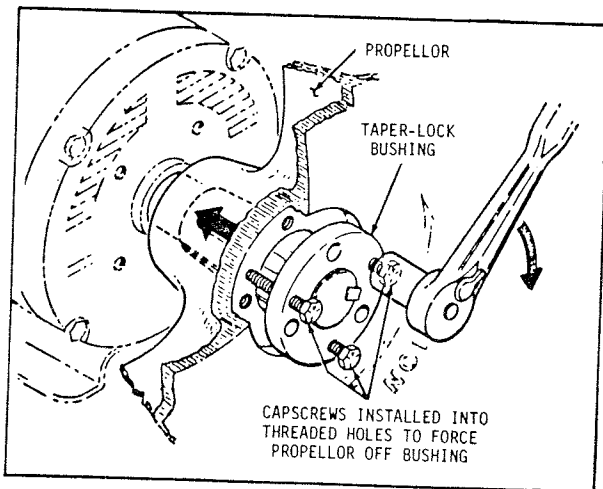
CAPSCREW ARRANGEMENT FOR DISASSEMBLY
